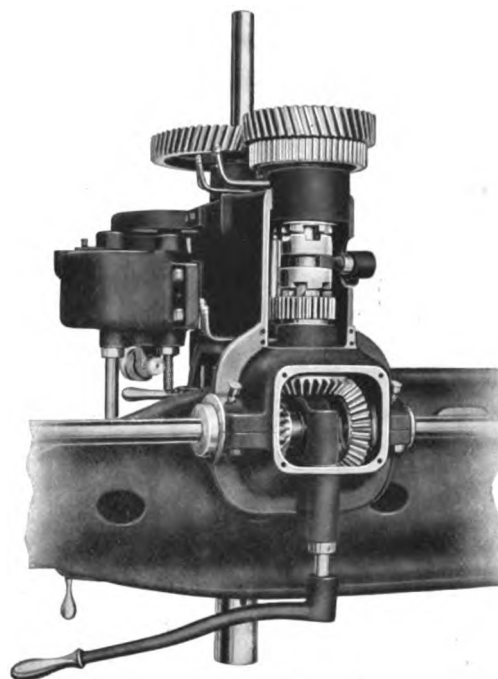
Rear View of Head of 2½, 3 and 3½ Ft. Radial. Head of 4 and 4½ Ft. Is Same Construction Except It Has Double Back Gears
